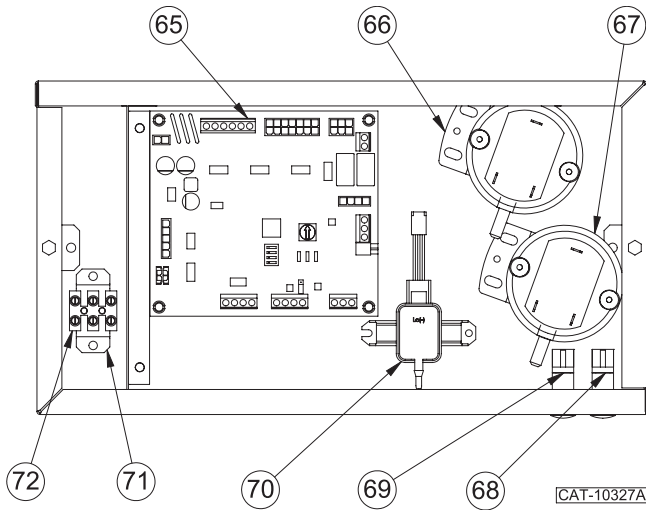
Vestibule Panel/Heat Exchanger Assembly
